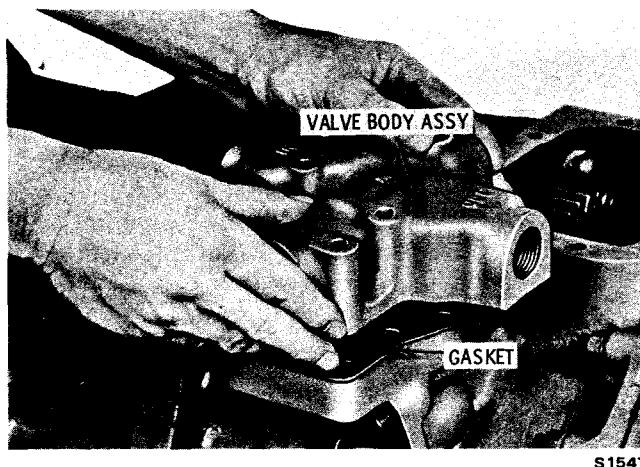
Installing main-pressure regulator valve body assembly (early models)
